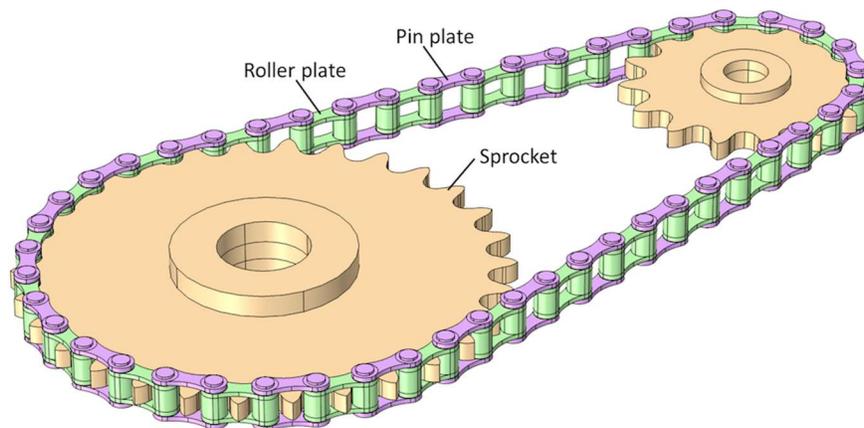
3D assembly of a roller chain and sprocket system [6].
